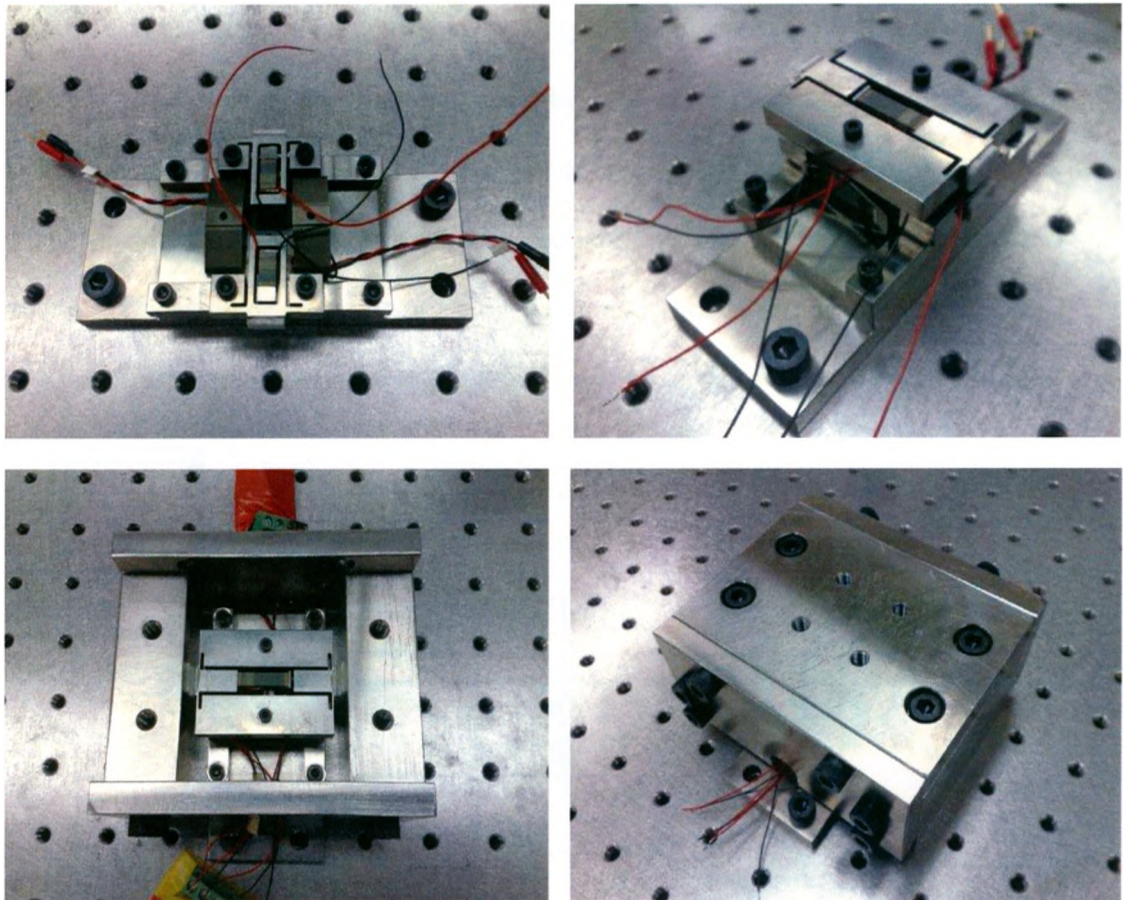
11. Photographs of vertical positioner prototype assembly.
